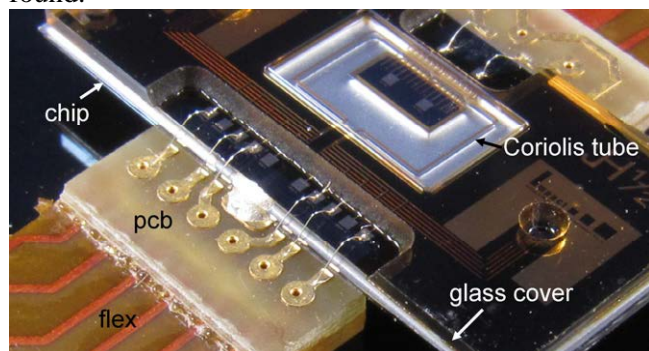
Micro Coriolis chip glued to a PCB. Electrical connections to the PCB are made with wirebonds.
